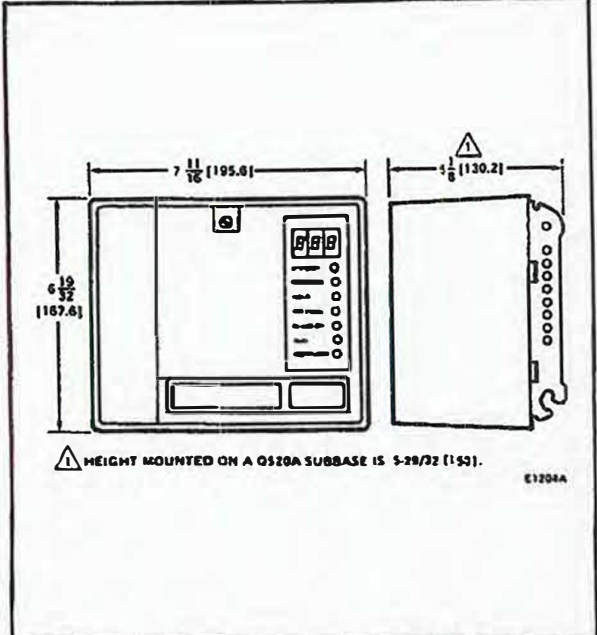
MOUNTING DIMENSIONS OF THE BC7000 IN in. [mm SHOWN IN BRACKETS].
